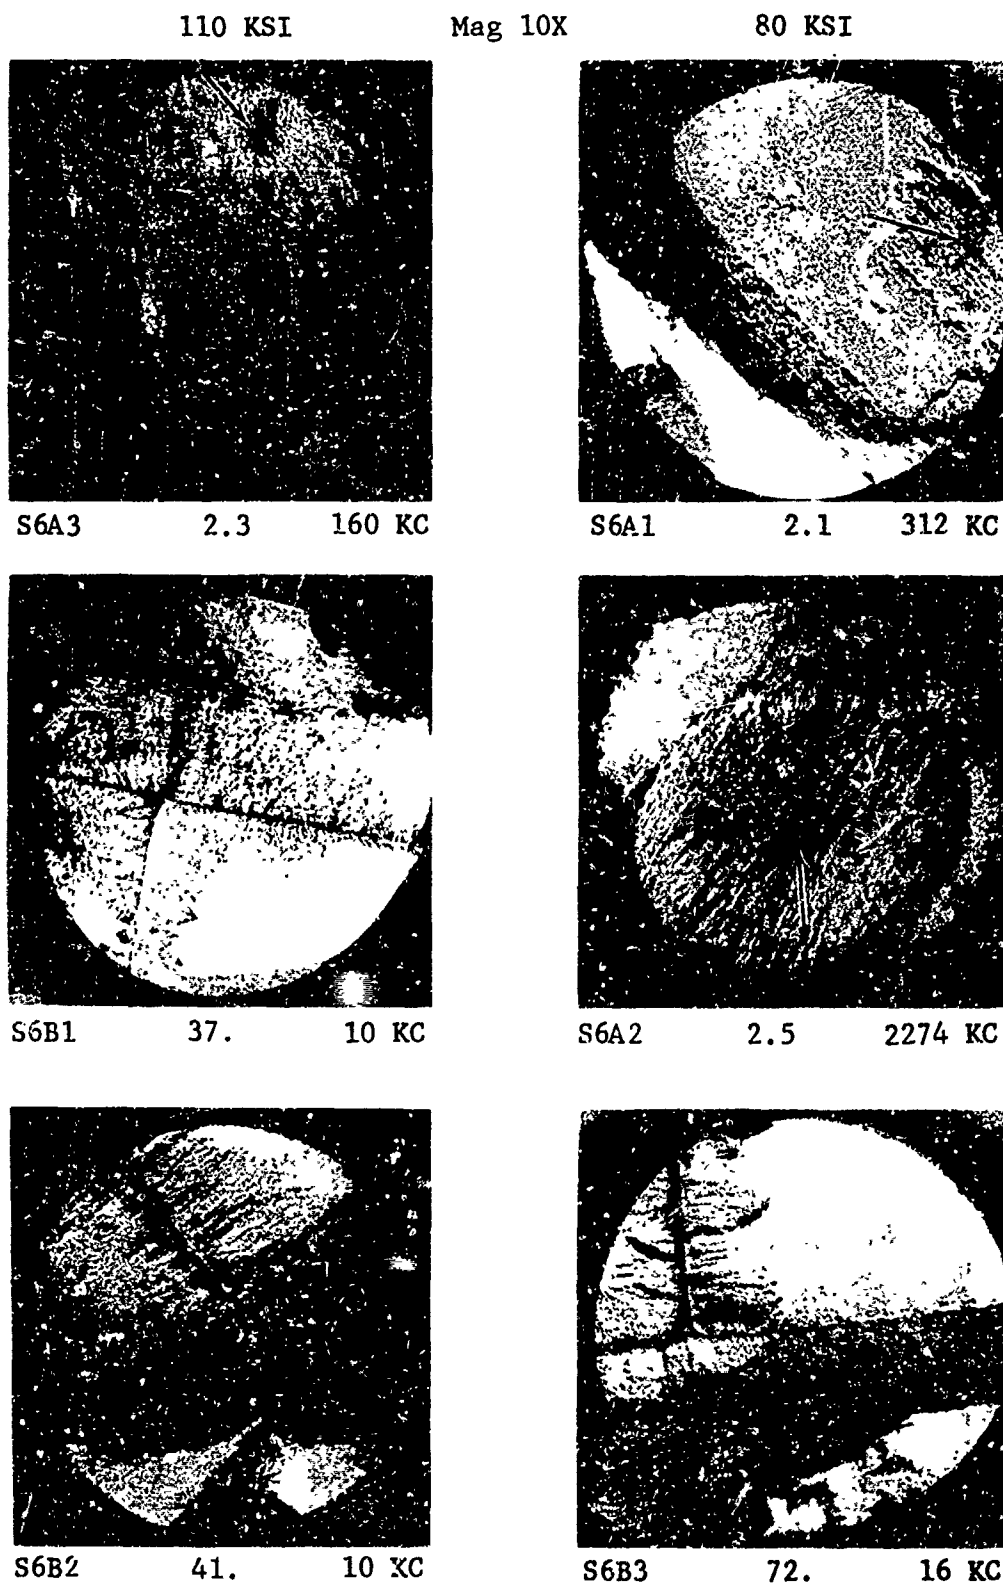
Fracture Surfaces of Failed Fatigue Specimens Series S6-
